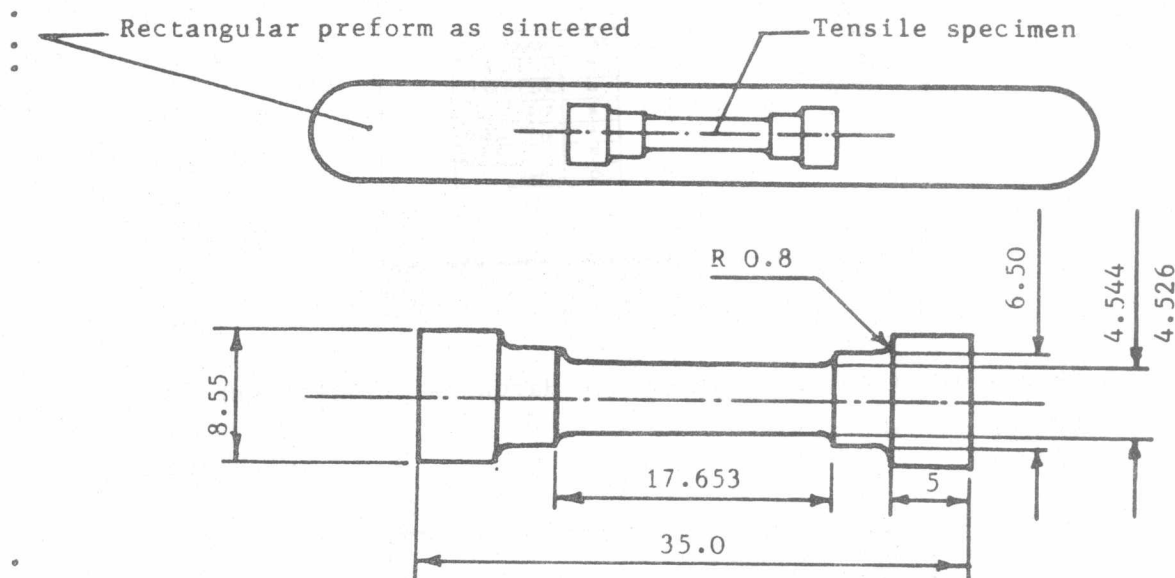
Position and Dimensions of Hounsfield Tensile Test Specimen.
